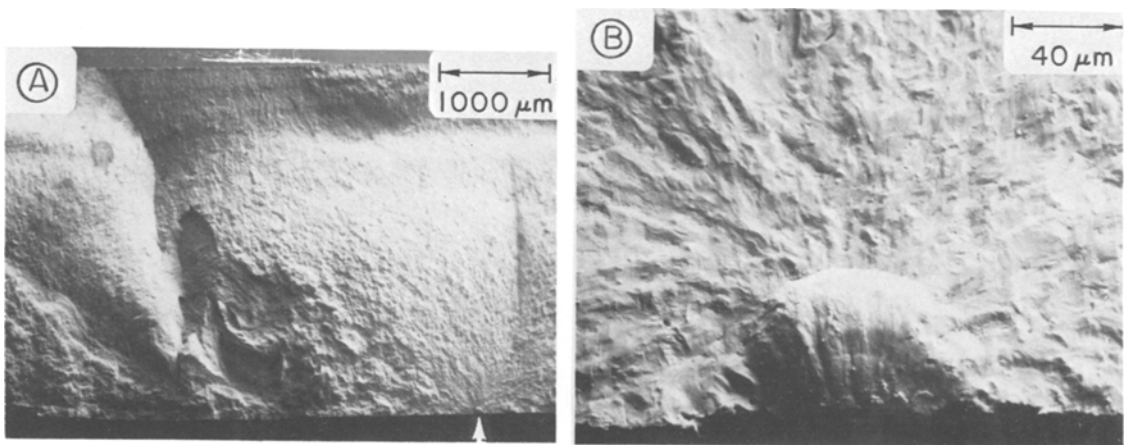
Failure from a machining flaw; (A) low magnification photo of fracture surface, note origin from flaw (arrow) surrounded by mirror, mist and hackle (especially on left because of location of origin nearer to the right-hand edge of the sample); (B) higher magnification of flaw at origin, note approximate penny shape (depth $\sim 60\ \mu\text{m}$) of flaw, transgranular failure and radiating fracture steps. Using the measured flexure strength of $35\ 400\ \text{lb in}^{-2}$ the flaw size and Young's modulus, a fracture energy of $13.8\ \text{J m}^{-2}$ was calculated.
